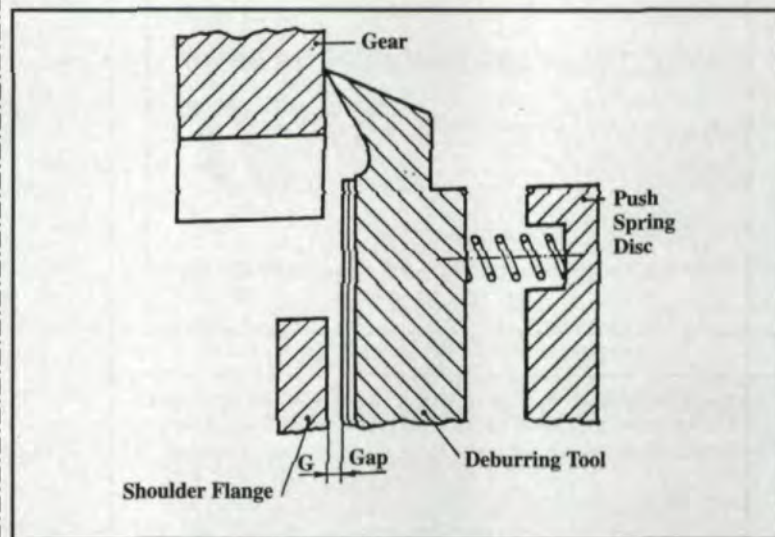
Cross sectional view of deburring tool with spacers and springs.
